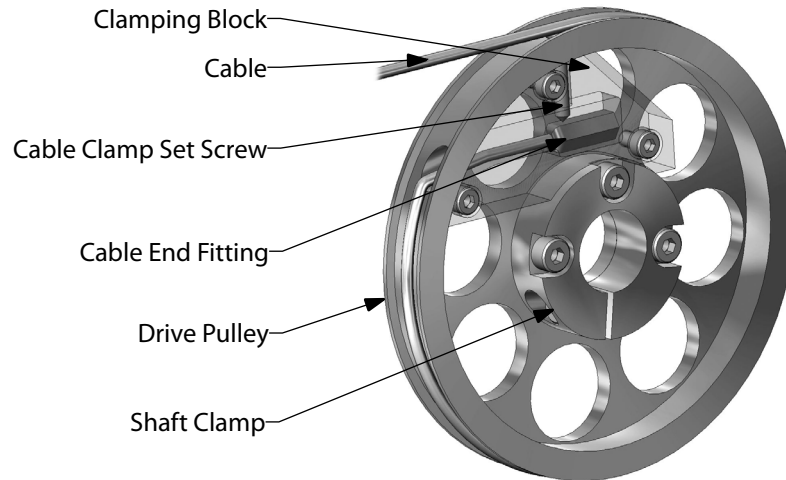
The drive pulley clamps to the joint shaft. The cable is fed through a hole in the pulley into a clamping block (made partially transparent in this view). A single set screw is used to lock the cable fitting into place so that it cannot be pulled out.
